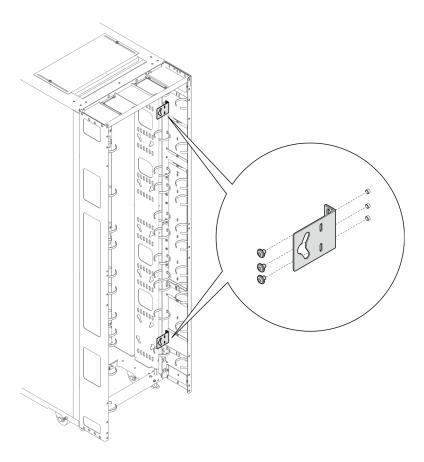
Installing the L-shaped bracket with the PDU facing the front of the rack cabinet
